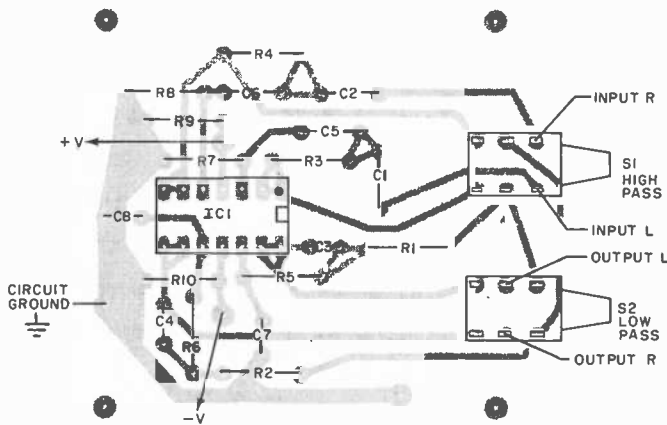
Full-size etching and drilling guide for printed-circuit board is shown at left. Diagram for layout of components is above.
